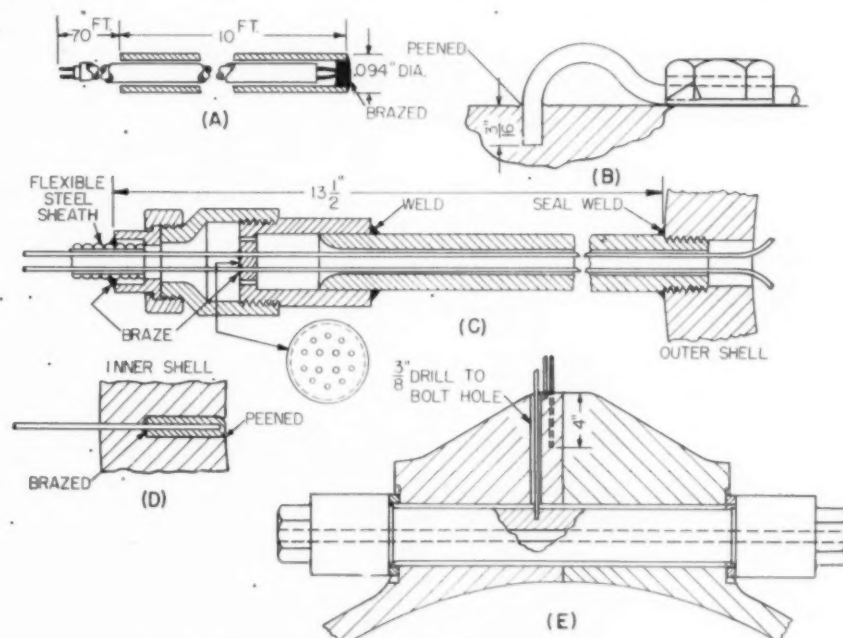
DETAILS OF THERMOCOUPLE CONSTRUCTION AND INSTALLATION
